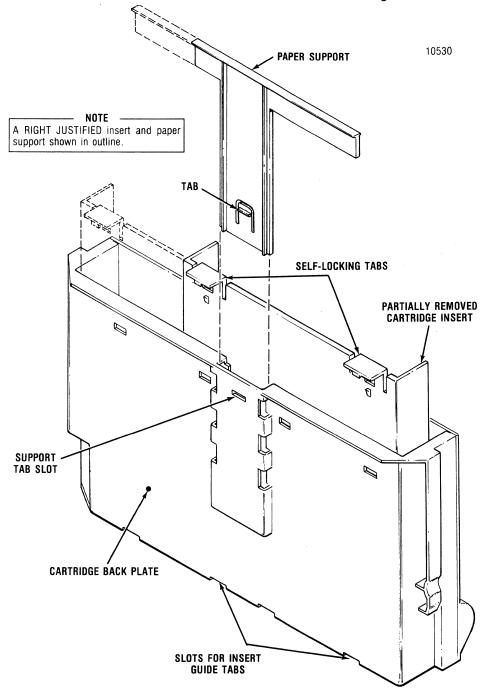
Removal/Replacement, Cartridge Insert (Fixed-Width Cartridge Shown: Insert and Support Justified Left)
